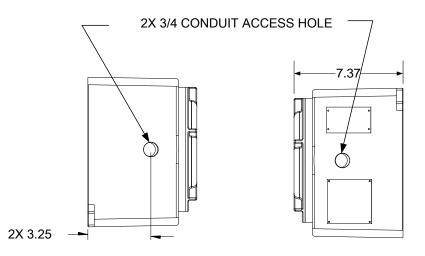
Explosion-Proof AC Power Supply Side Dimensions
